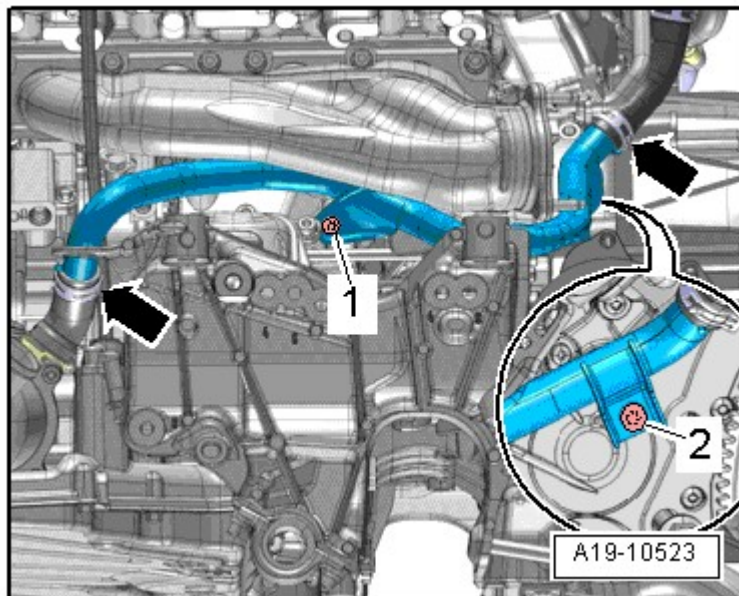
Identifying Bolts -1 & 2- & Move Lower Left Coolant Pipe To Side
